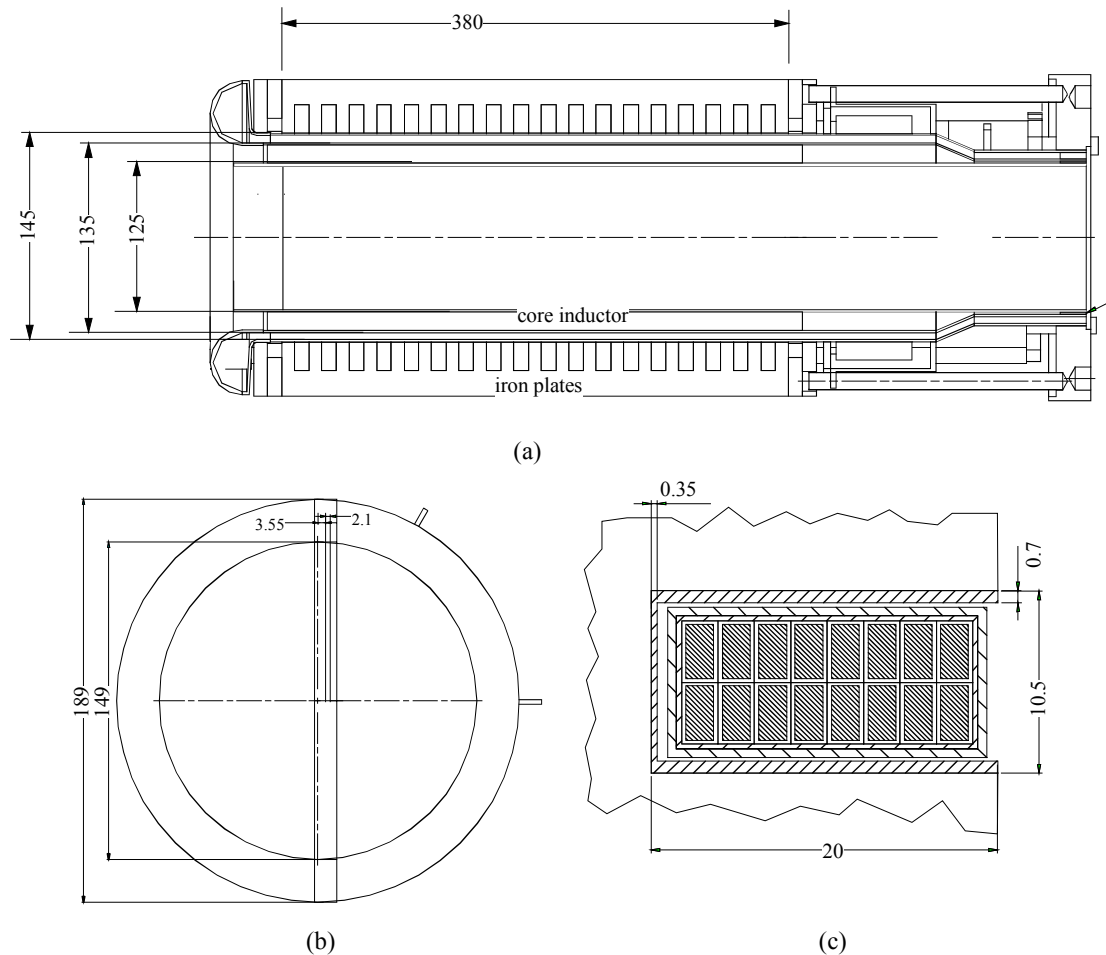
Technical sketch of the bypass pump of the Riga tandem unit. (a) Inductor and inner core, Iron package consisting of 1068 steel sheets. (b) Coil system and its connectors. (c) cross sectional cut through one coil package (wire dimensions are the same as in the main pump).
